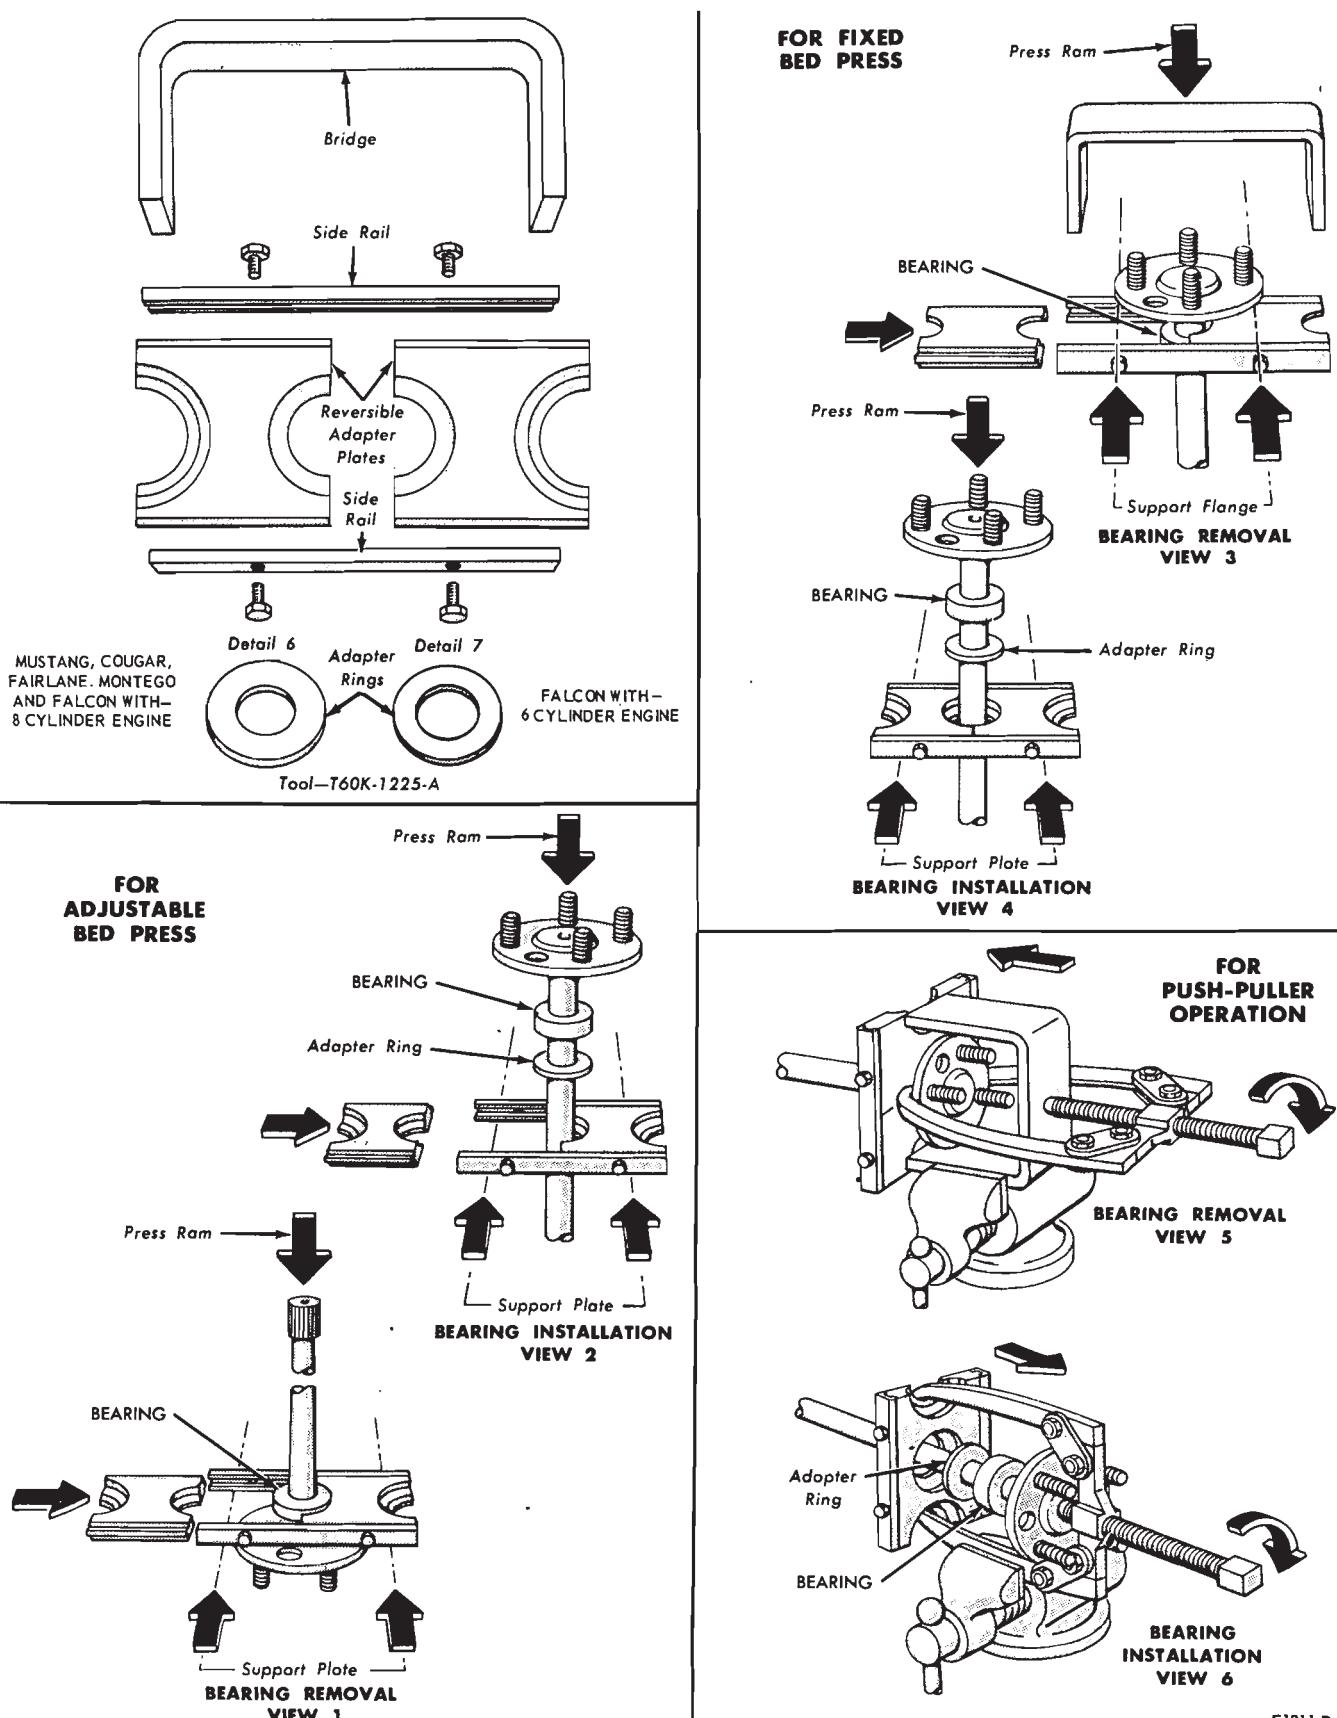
Removing and Installing Rear Wheel Bearing—Falcon, Mustang and Fairlane
